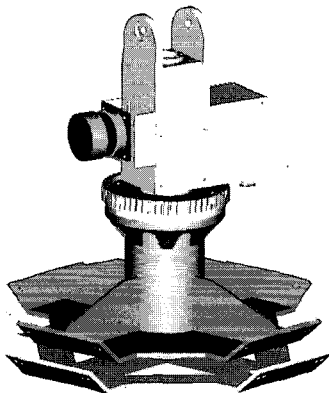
Assembled CAD model of the base, yaw and roll modules
